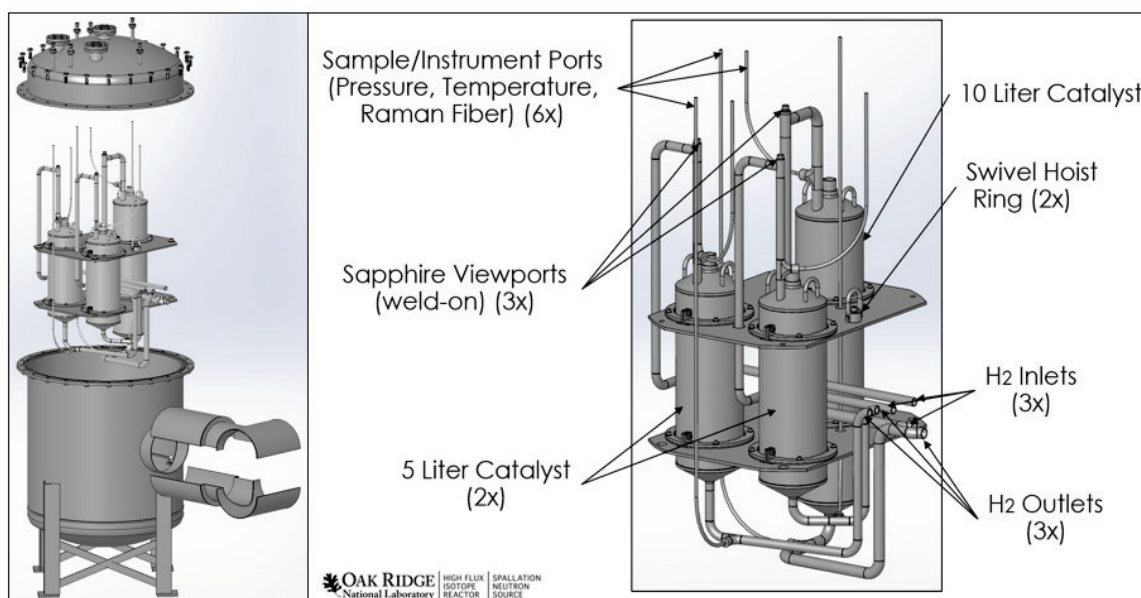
Catalyst vacuum vessel assembly (left, exploded view), and catalyst module subassembly (right).
